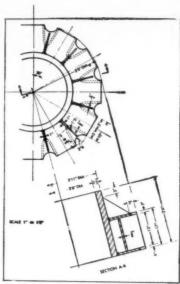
Detail of construction of center hub in piece shown in Fig. 28,
